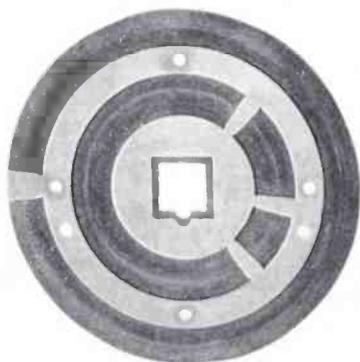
All but the A cam are double sided and may be cut in any manner desired
